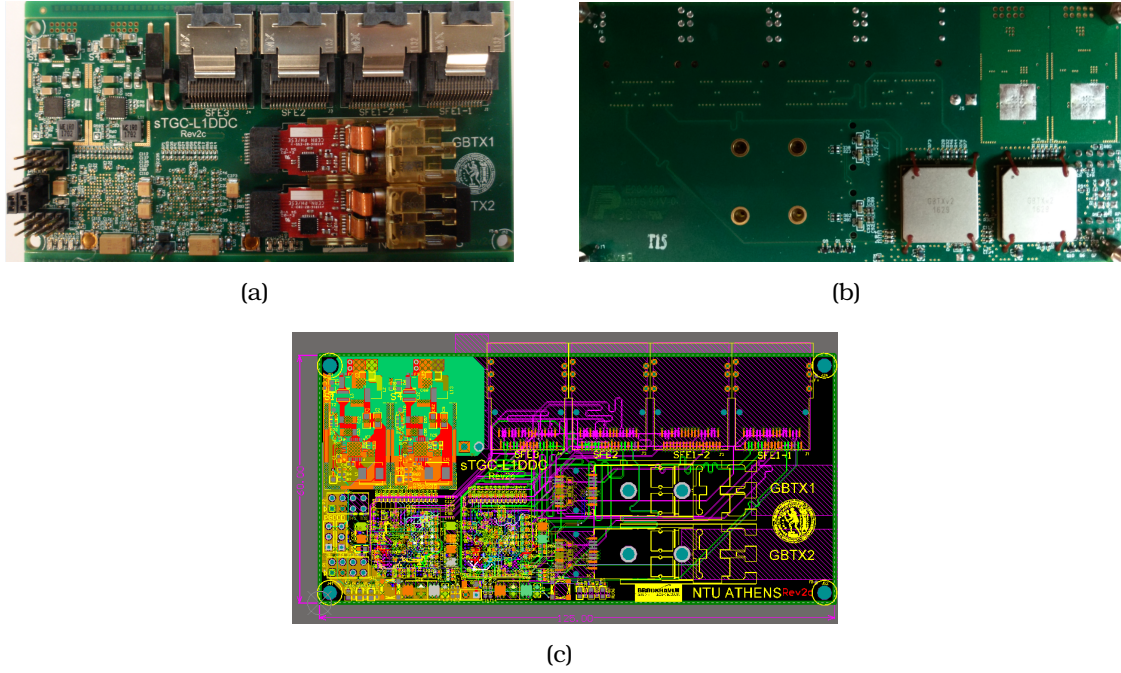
(a) top side, (b) bottom side and (c) layout of sTGC-L1DDC Prototype-3 board.
